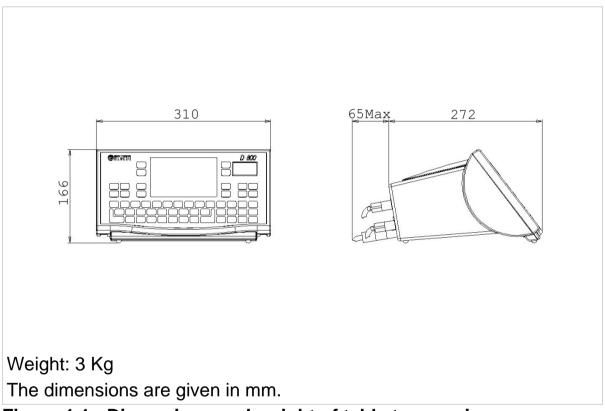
Dimensions and weight of table top version (citi0401.jpg)
